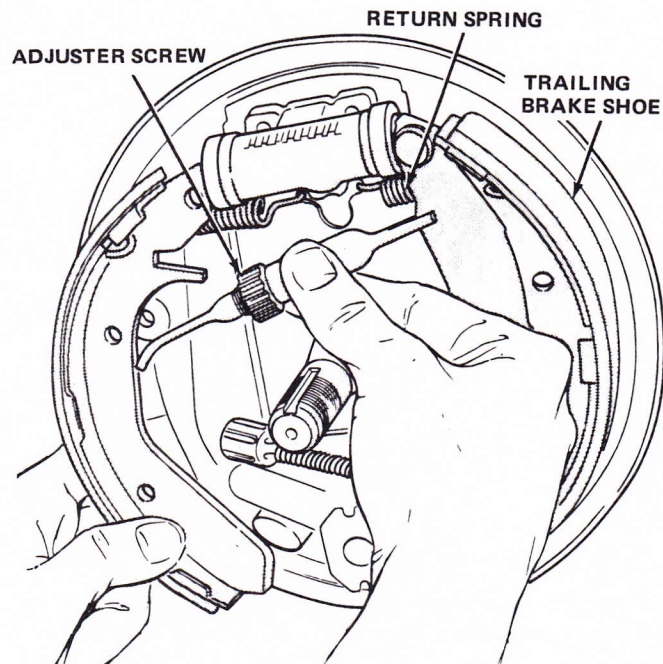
Using the brake-shoe adjusting gauge to set the preliminary clearance between the linings and the drum. (Ford Motor Company)
